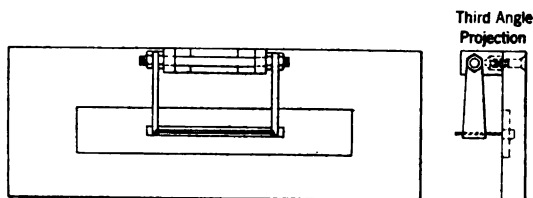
APPARATUS FOR MAKING BREAK-DOWN VOLTAGE TESTS ON NARROW STRIPS OF INSULATION—PLAN AND ELEVATION
